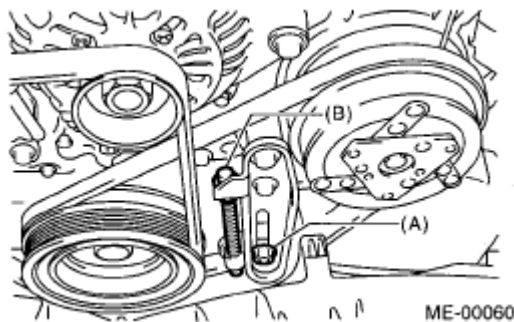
Identifying Rear Side Belt Lock Nut And Slider Bolt
